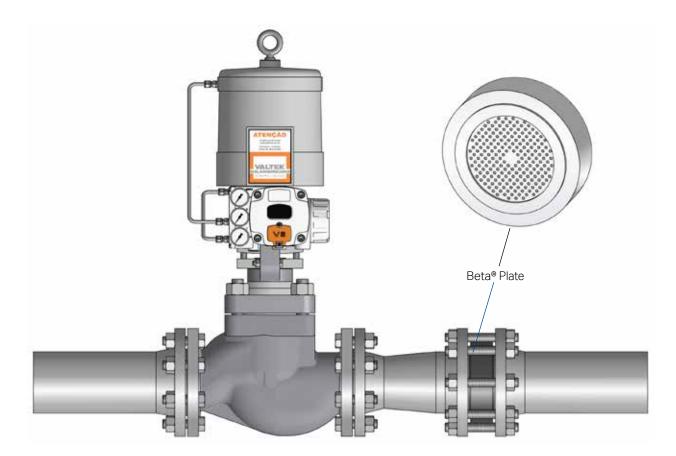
Beta® Plate Assembled Downstream of a Globe Valve
